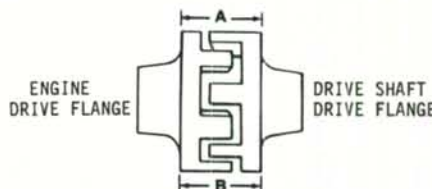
Distance (B) should not exceed distance (A) by more than 0.6 mm (0.024 in.).
